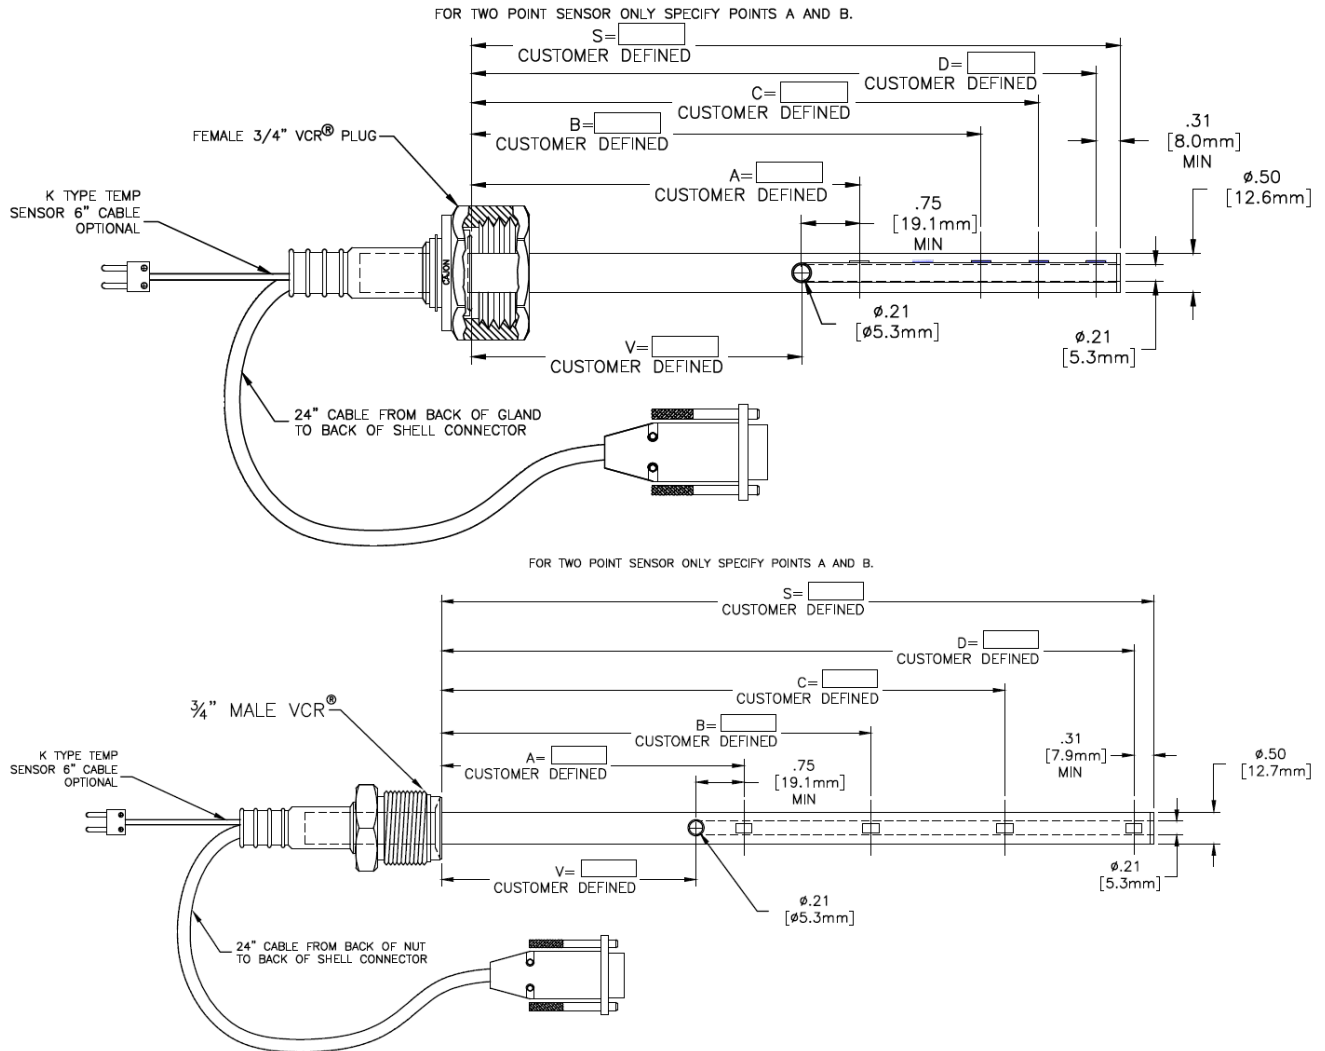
SL-900 series with 1/2" OD tube. The top drawing shows a 3/4" female VCR® fitting while the bottom drawing shows a 3/4" male VCR® fitting.
